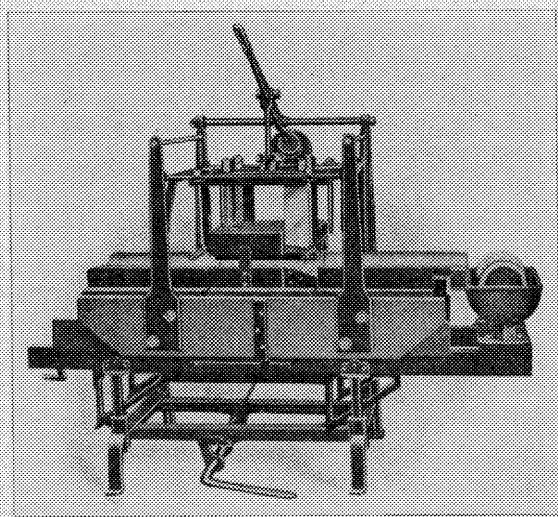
Spanish Tile Cutter, by the American Clay Machinery Company.
